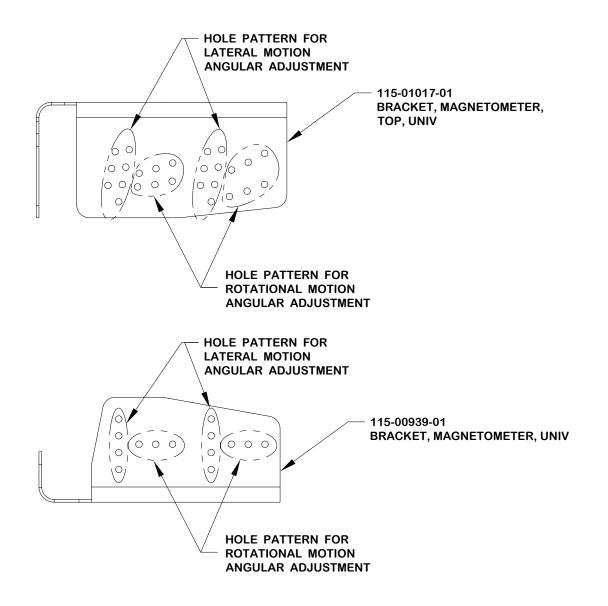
GMU 44 Universal Mount Top and Bottom Hole-Patterns
